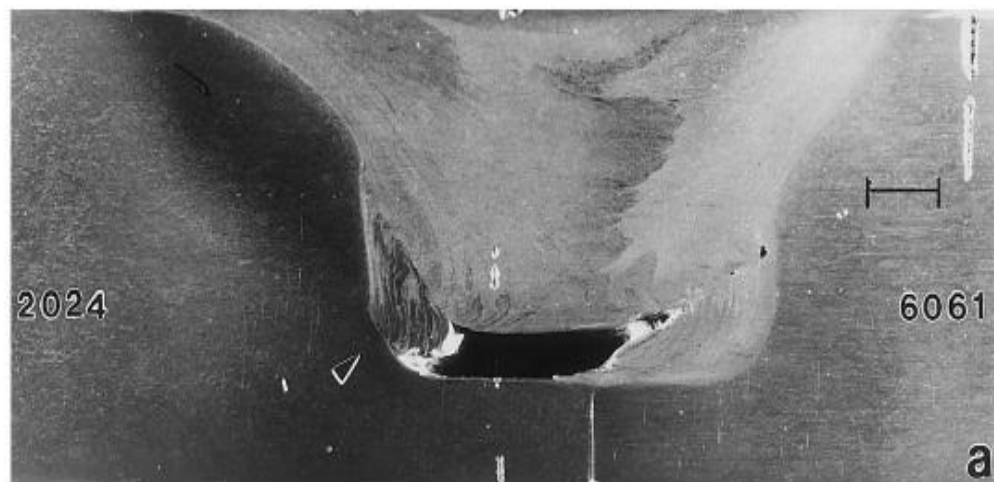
Representative Al2024 and Al6061 FSW microstructure weld cross-section showing large tunnel and unwelded plate at weld bottom (Ying Li. et.al. 1999)
